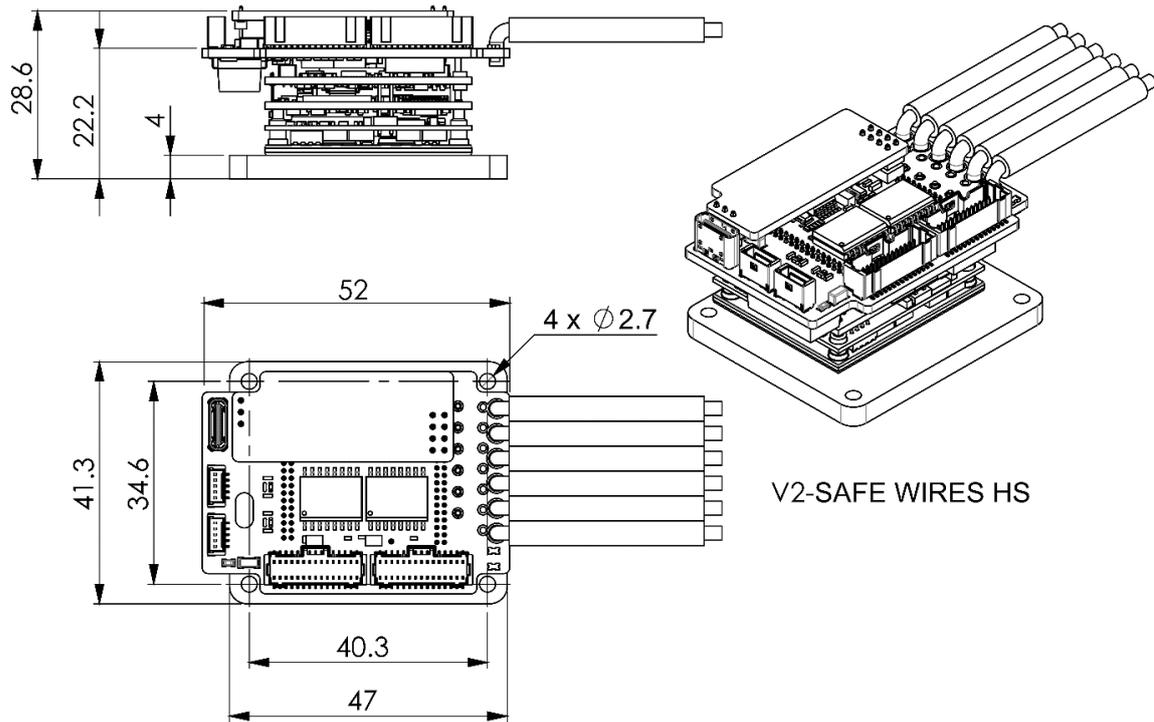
Platinum Solo Twitter – Wired version with Heat Sink Dimensions
